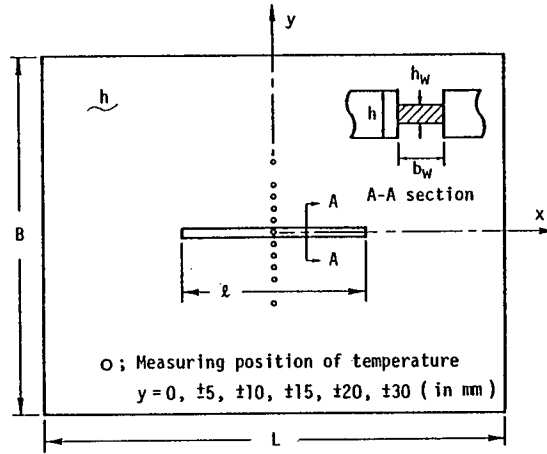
Slit weld specimen and measuring position of temperature
